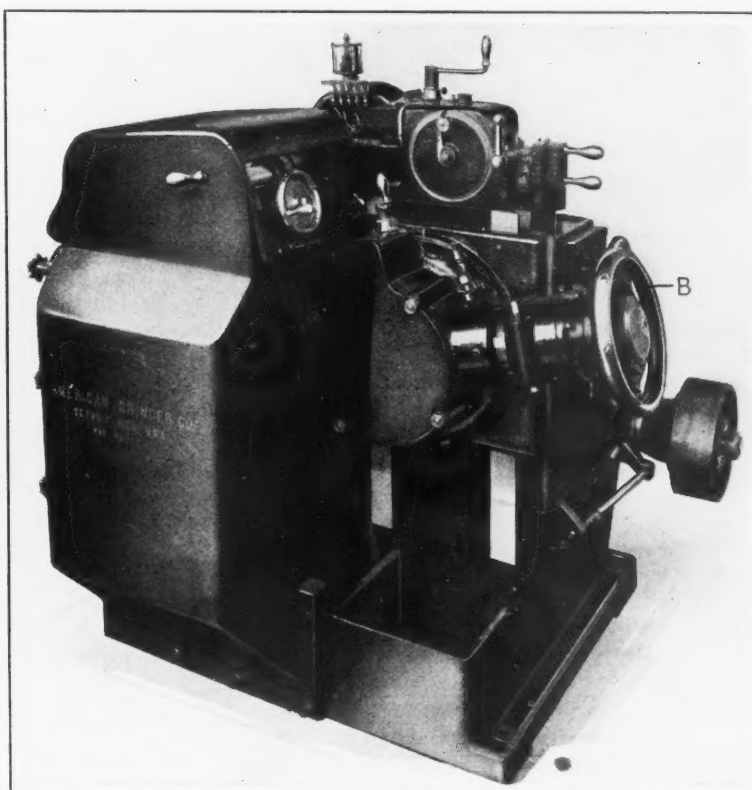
Generating Type of Gear-tooth Grinder made by the American Grinder Co.
